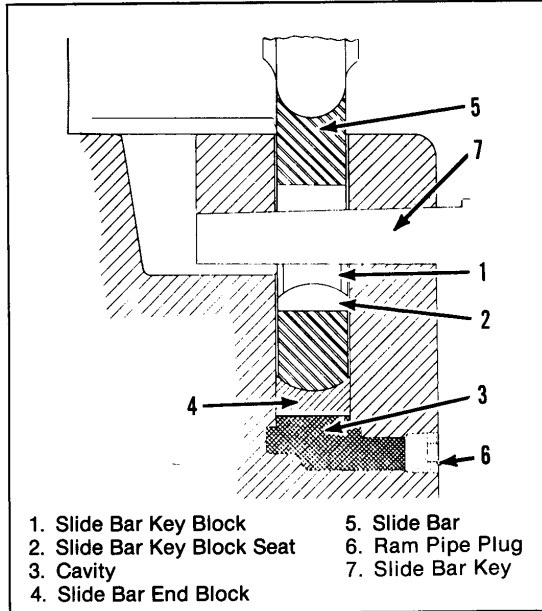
Slide Bar Pocket Assembly
